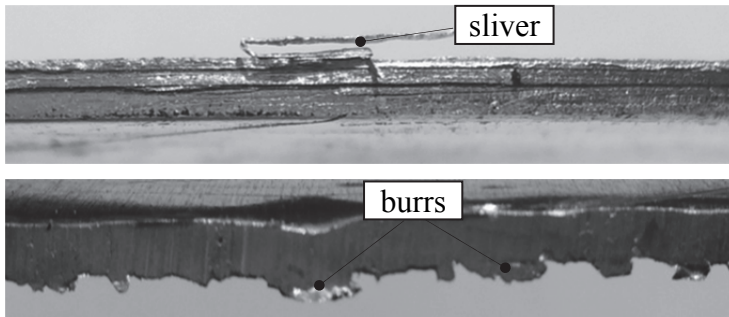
A typical defects of the workpiece's sheared edge
